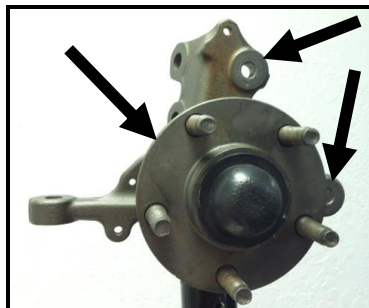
Ensure the caliper mount holes and hub surface are free of debris
